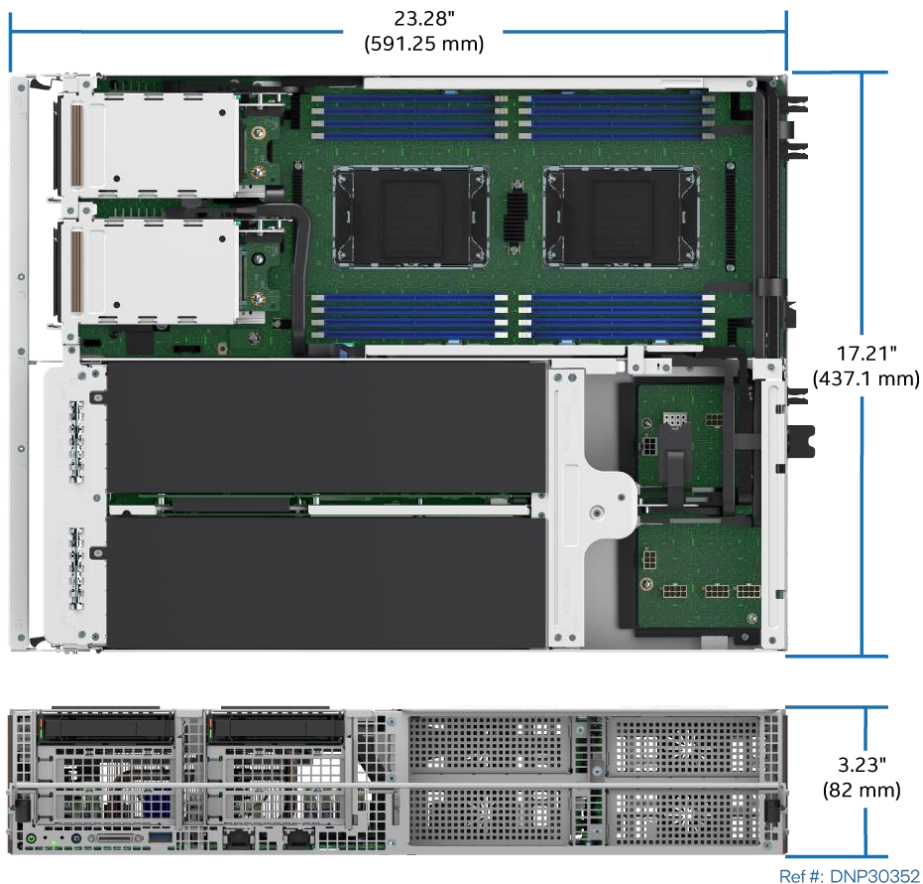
2U PCIe\* Accelerator Module Dimensions
